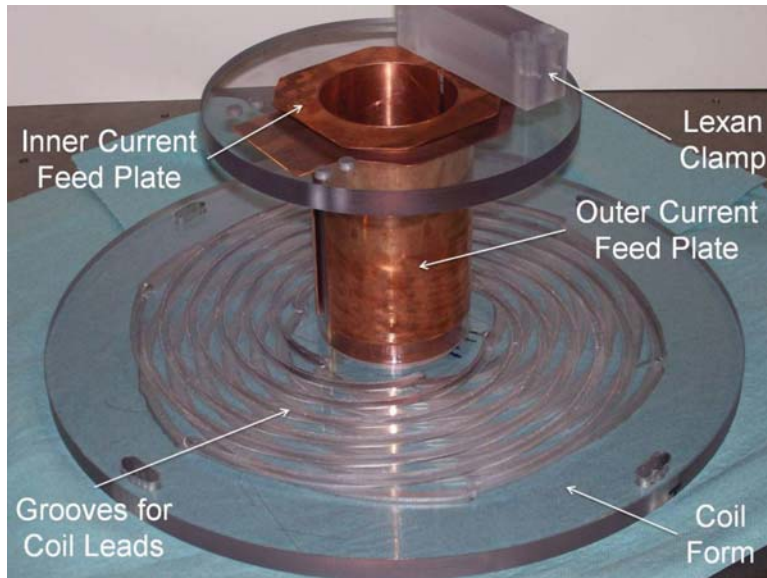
Coil assembly (partially assembled), showing the coil form (without leads), coaxial current feed plates, and one of the Lexan clamps.
